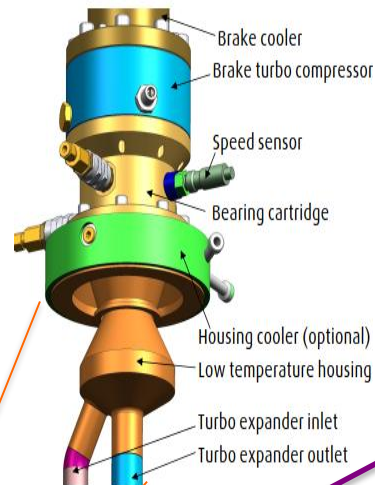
UCB, upgraded, TED45 low temperature housing placement and welding seams
